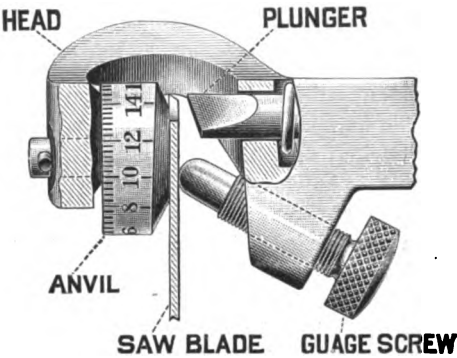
SECTIONAL VIEW, SHOWING MECHANISM.
